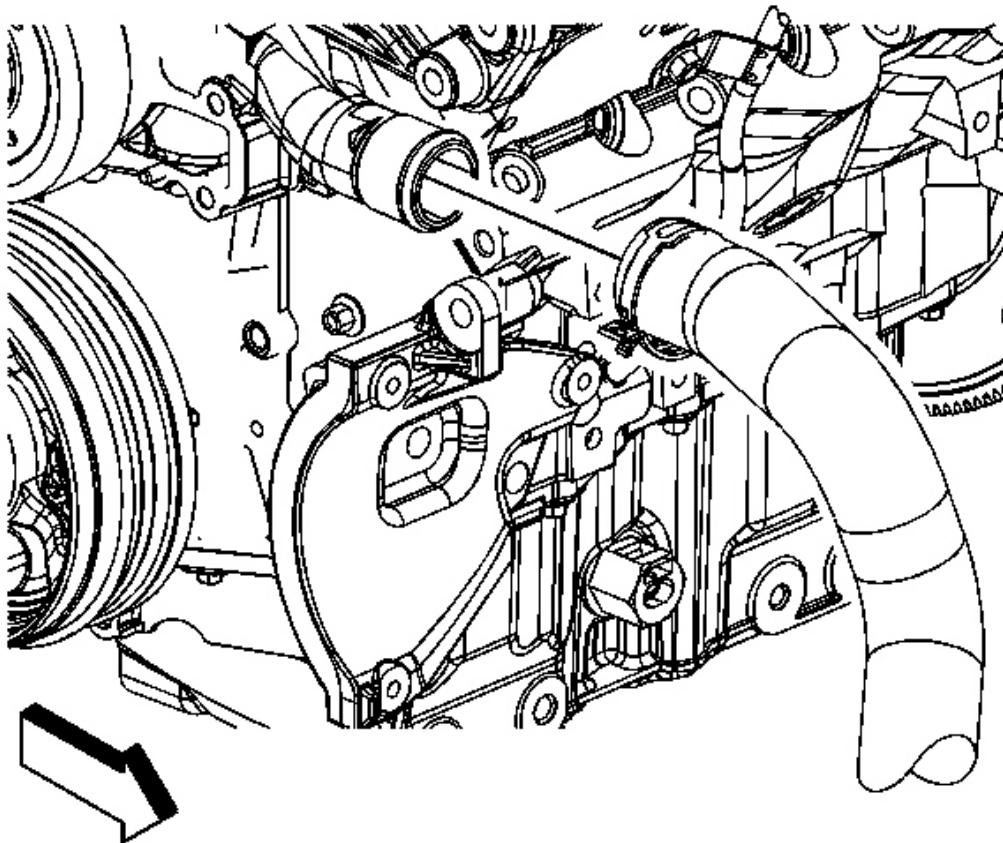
Identifying Oil Pressure Sensor Connector
